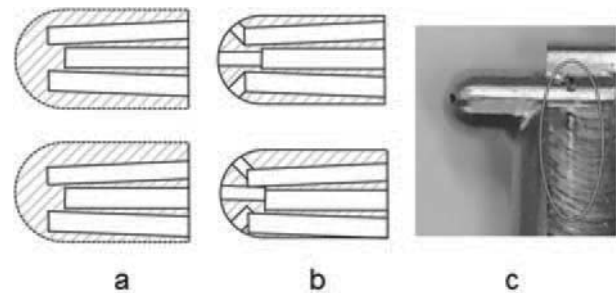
Insufficient accuracy of the position of the pressure channels inside the probe head (a: raw part, b: re-machined part, c: damage of a pressure channel due to asymmetric position in the probe head)
